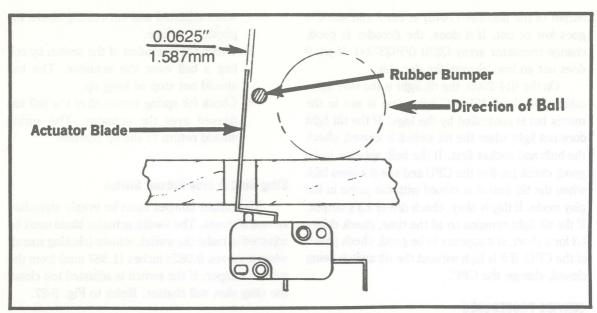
Sling shot and side rubber switch adjustment. Adjust the actuator so that the switch trips within the limits shown.
